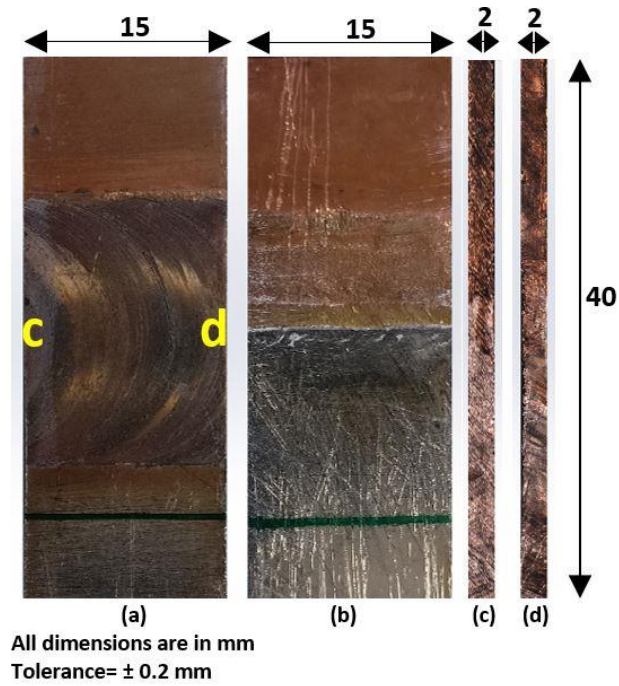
Dimensions of FSW (Cu-SS) strip: (a) Weld face (WF), (b) Weld root (WR), (c) Cross-section-c as located in (a), (d) Cross-section-d as located in (a)
